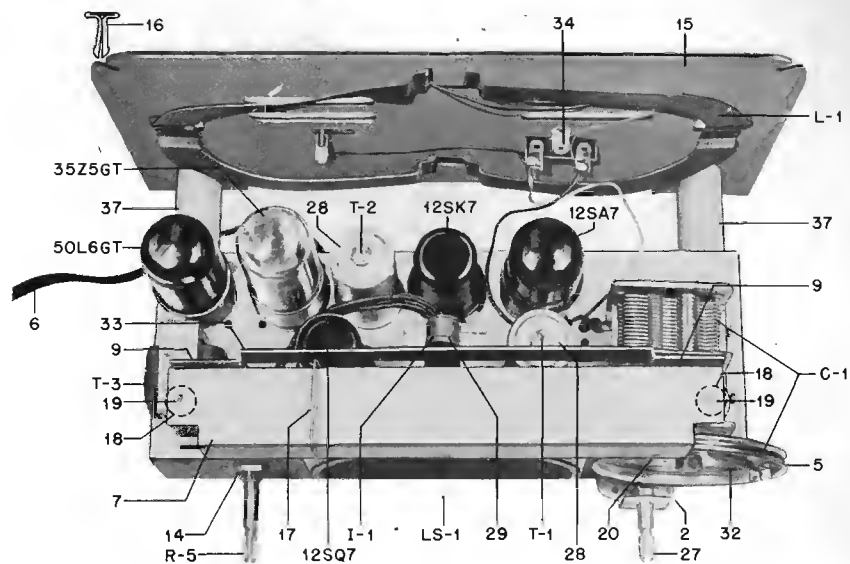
PARTS LOCATION - CHASSIS TOP
